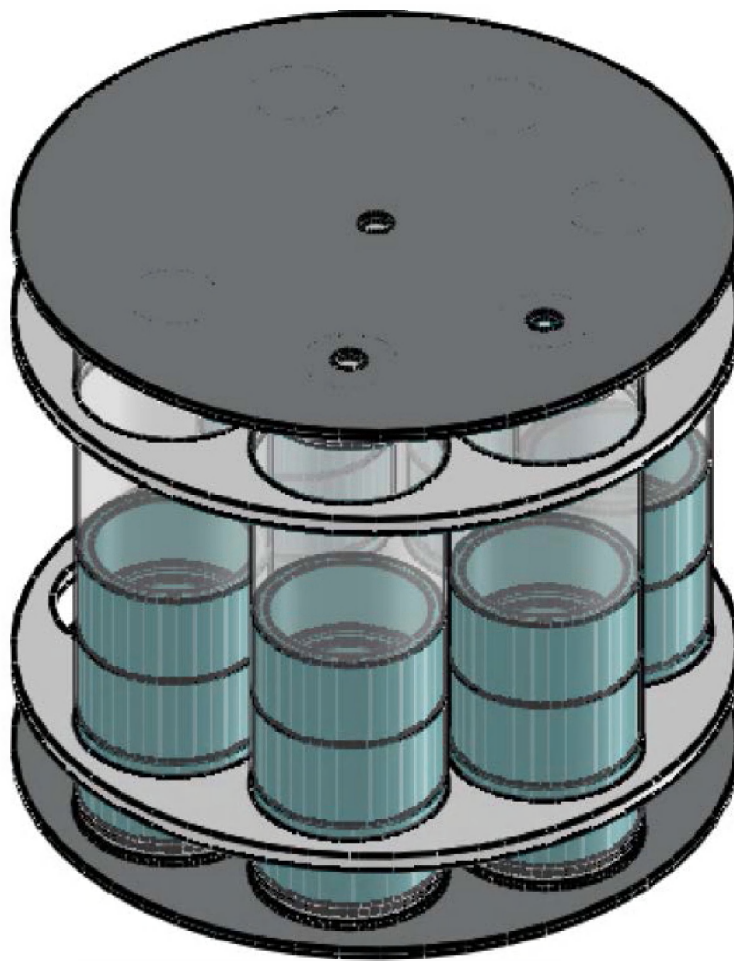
Perspective view of Slurp Cylinder showing placement of filter cups in six of seven chambers. Each filter cup will be fit with a 25 μm stainless steel filter at the bottom of the cup to support a 2.7 μm glass fiber filter. The holes in the top plate will be aligned with the sample chamber to allow water to be pumped through the chamber trapping the sample on the filter. The cover plate will be equipped with a Viton gasket to seal the chambers as they rotate into position.
